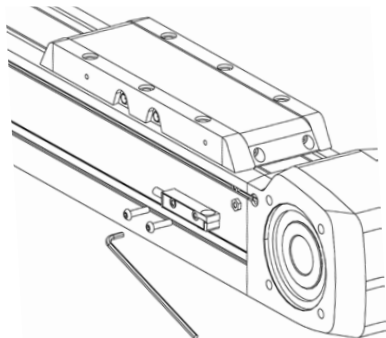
Mounting the limit switch: HM060, HM080, HM120
